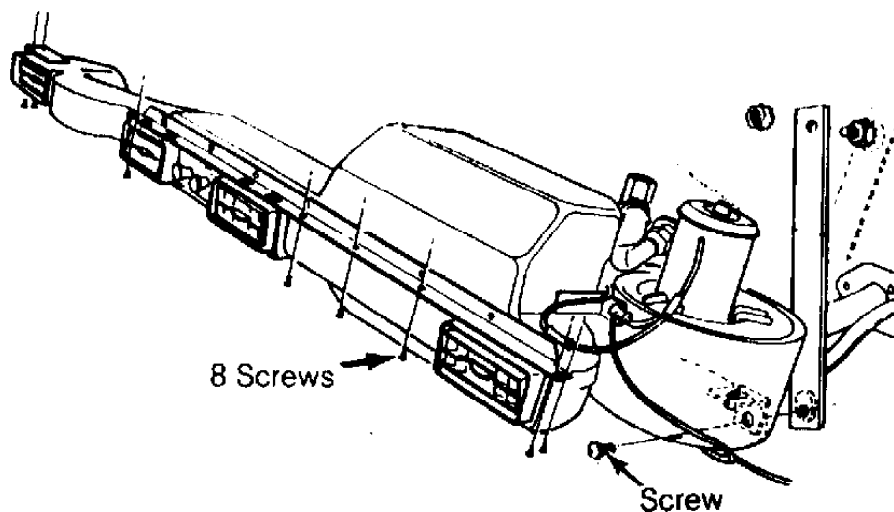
Wrangler Evaporator Housing Mounting Screw Locations
